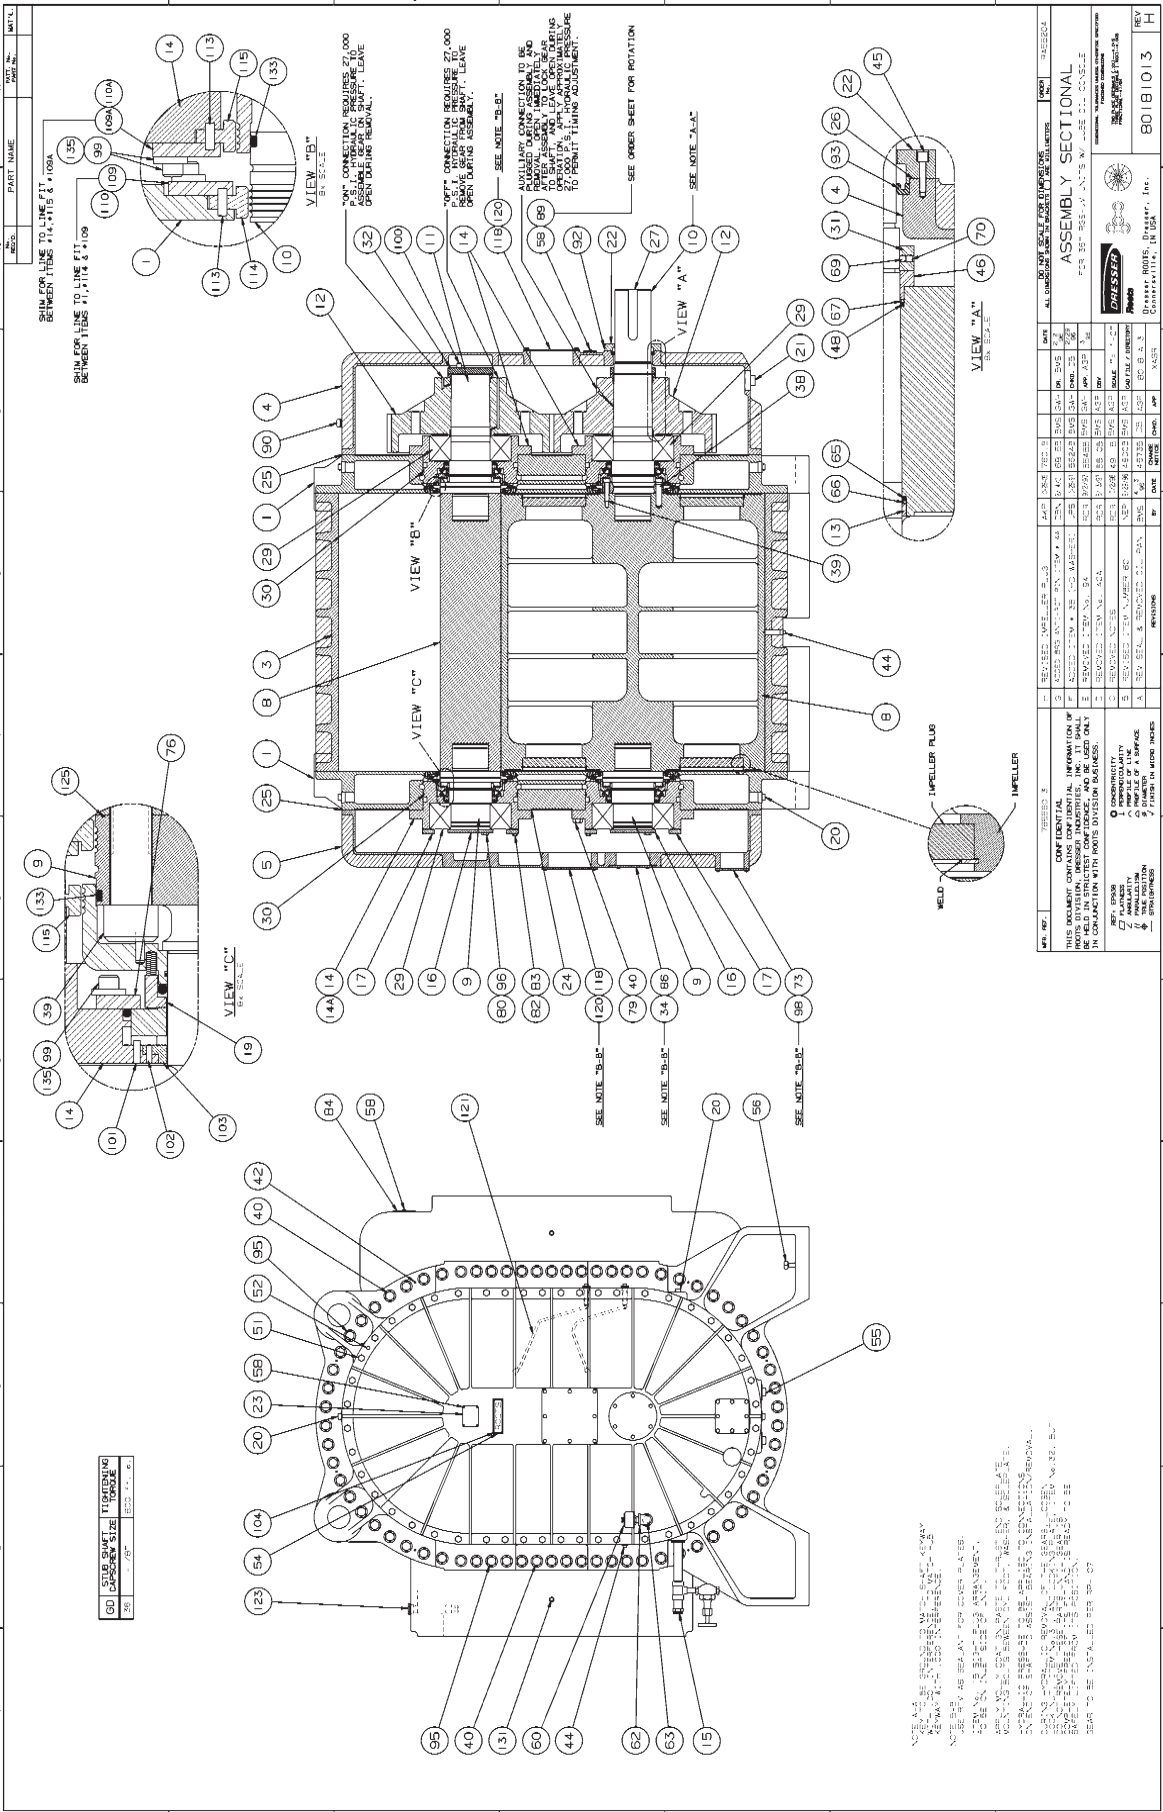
Assembly of 36" RGS-J Gas Compressor with Integral Oil System
